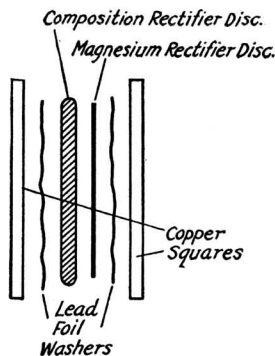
A SINGLE RECTIFIER ASSEMBLY
